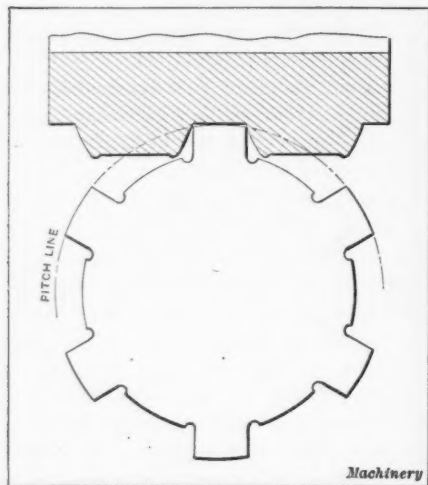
Hob Tooth for generating a Six-spline Shaft
